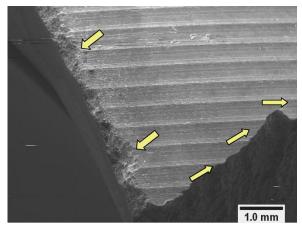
Machined piston surface, split off material and fracture surface
